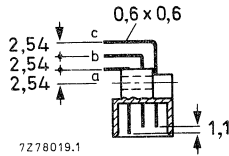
90° angled dip-solder pins, with protruding earth contacts.
